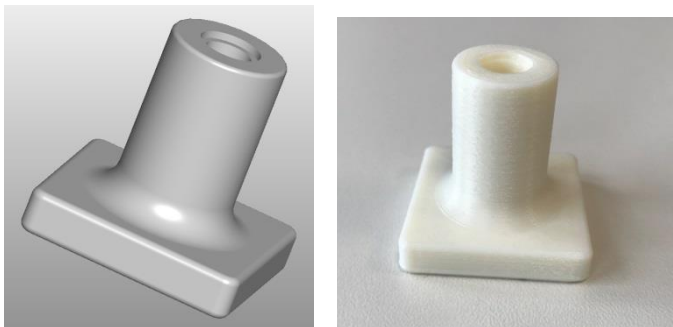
Boss as print template: left: CAD 3D rendering, right: printed boss
